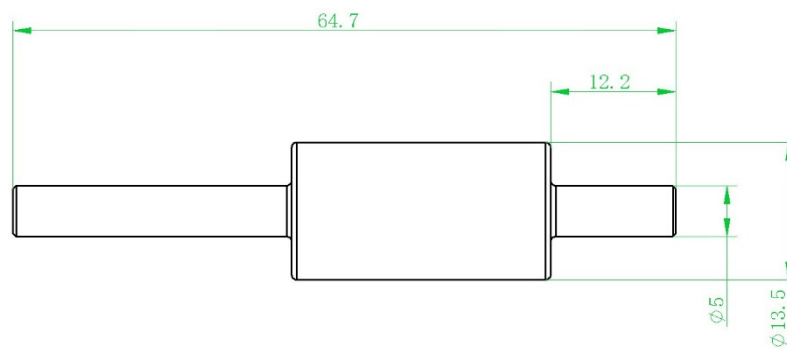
Engineering drawing of the moving armature, showing the working length $L=12.2\text{mm}$
